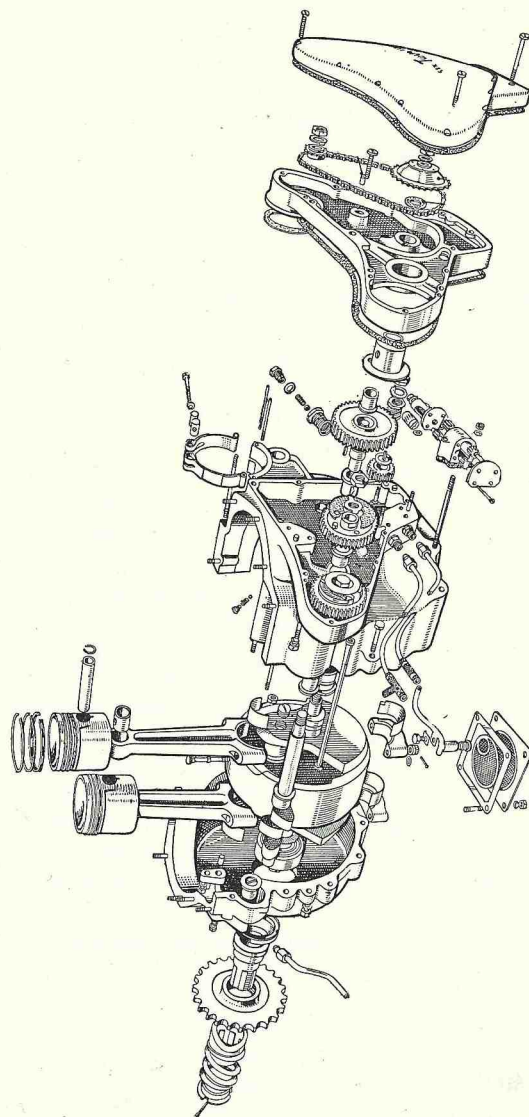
EXPLODED VIEW OF 650-C.C. TWIN-CYLINDER MODEL FH BOTTOM HALF.
